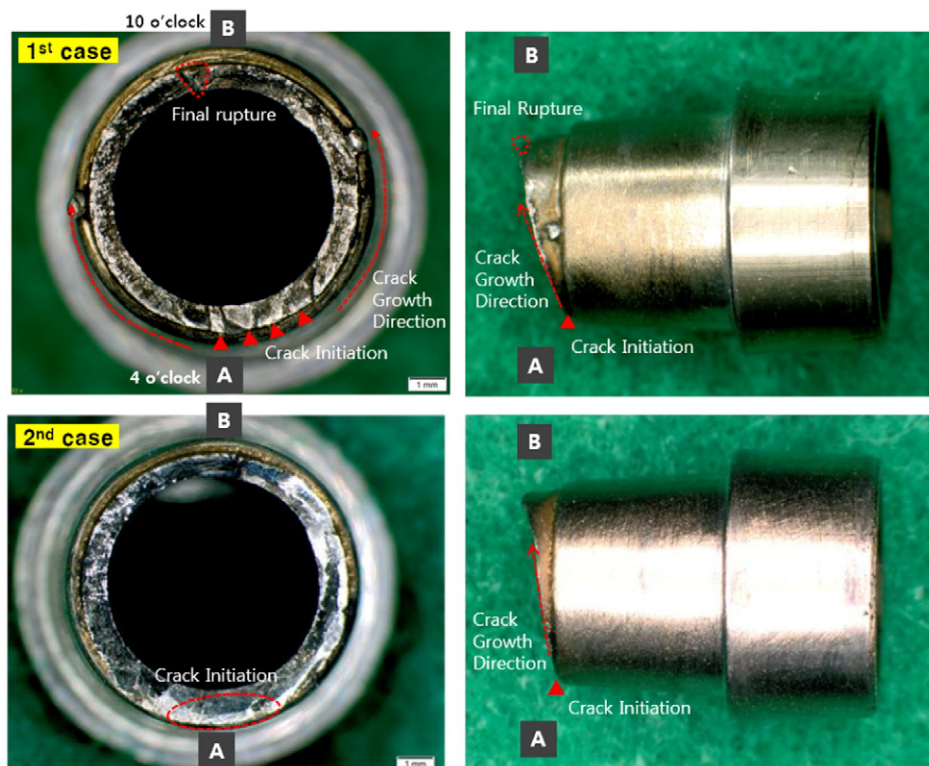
Fracture surfaces of the failed tubes.
